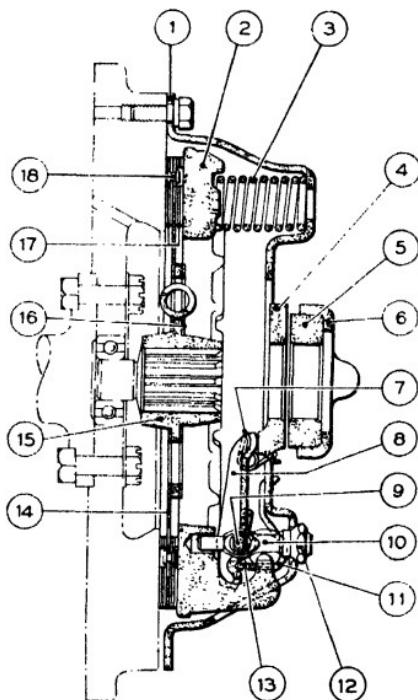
TYPICAL BORG AND BECK CLUTCH.
